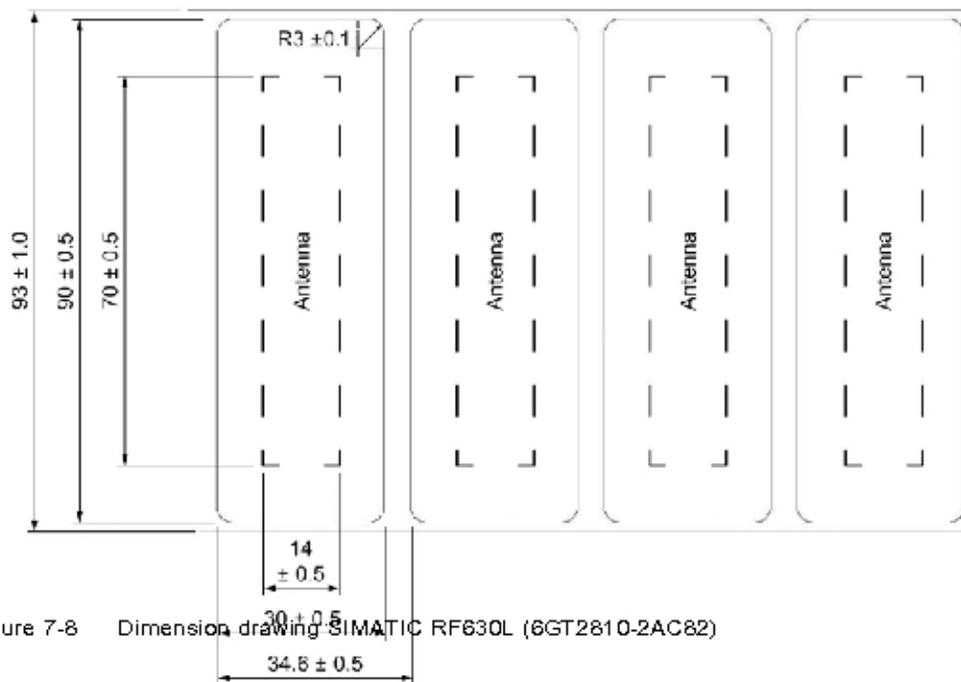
Dimension drawing SIMATIC RF630L (6GT2810-2AC82)
